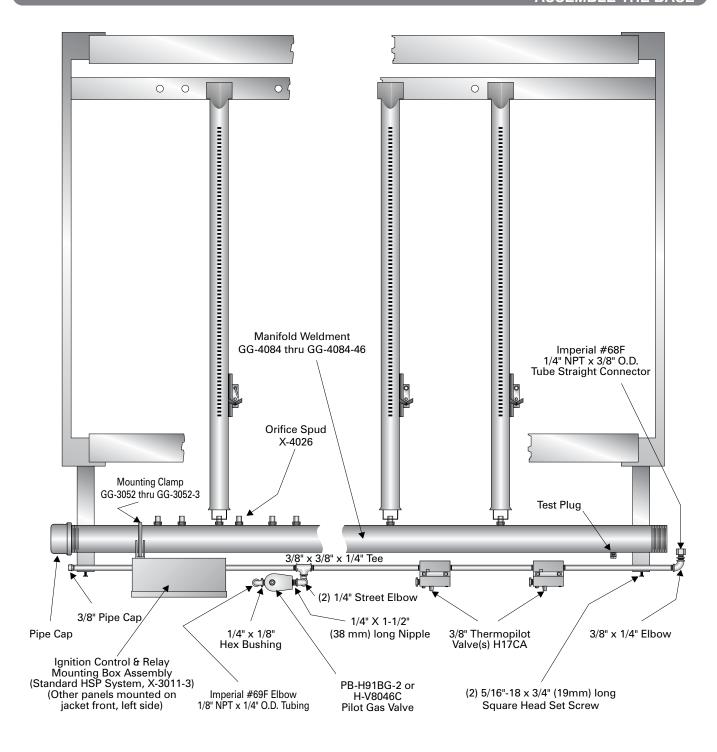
Typical Gas Manifold and Pilot Line Assembly
